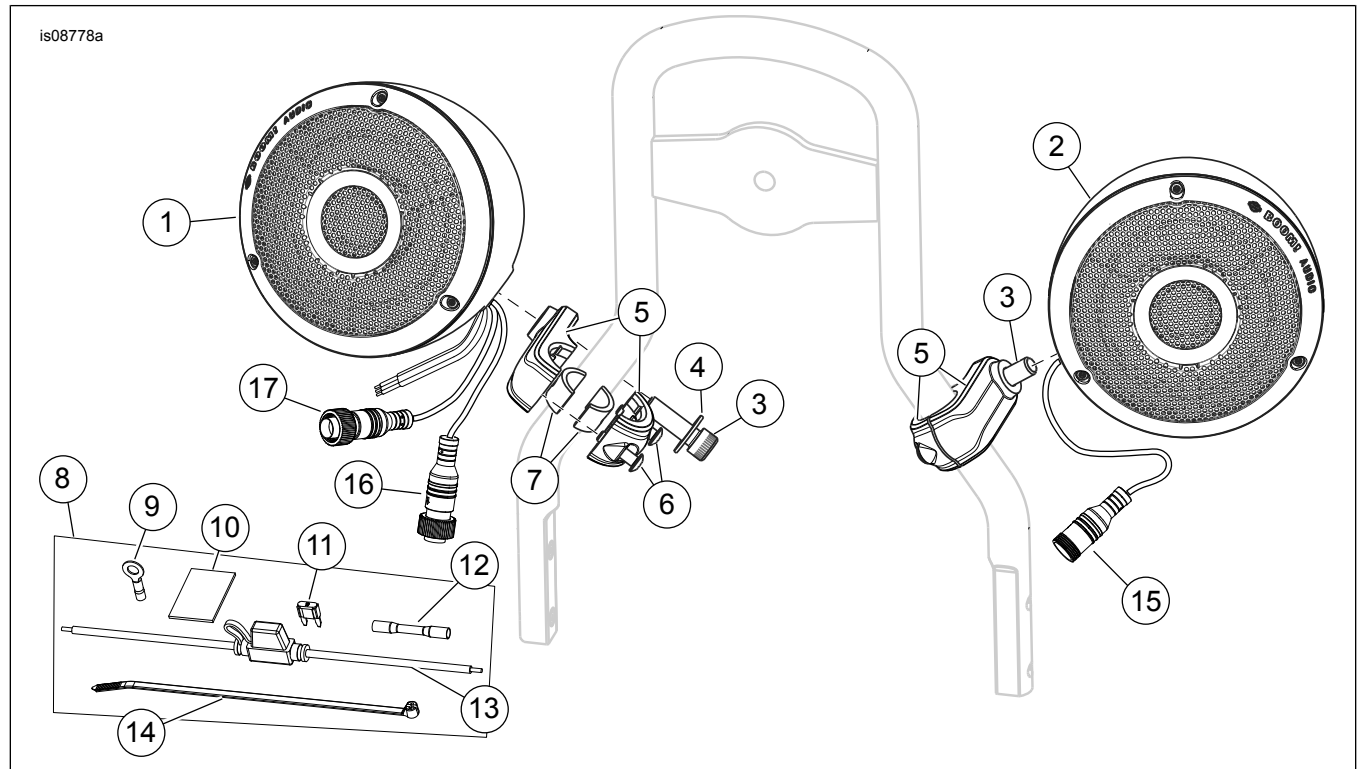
Service Parts, Upright-Mounted Speaker Kits
